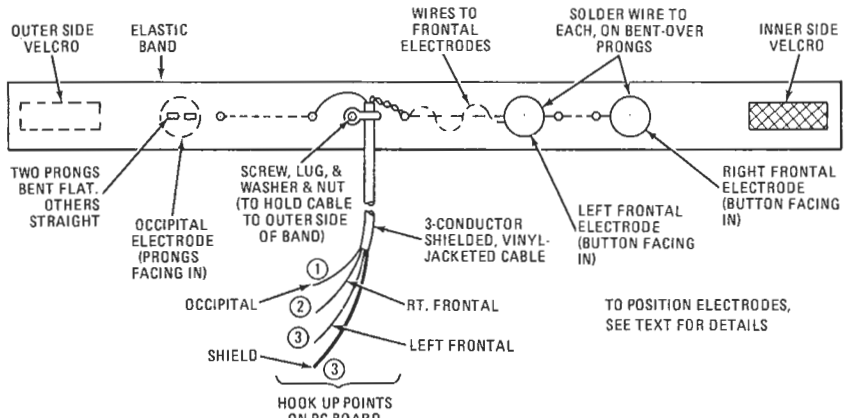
HEADBAND ASSEMBLY details. View is from inside surface of headband.
